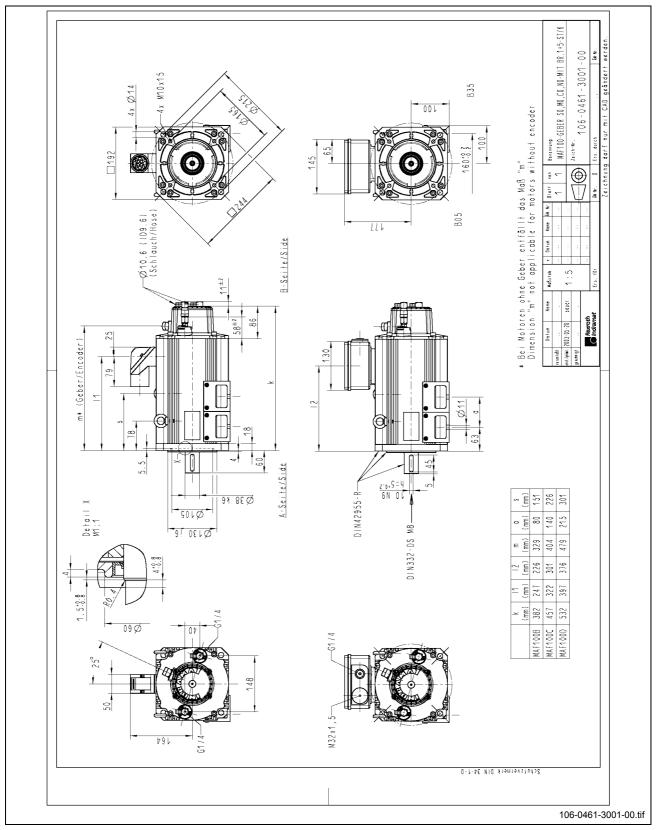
Dimension sheet for MAF100, with brakes 1 and 5
